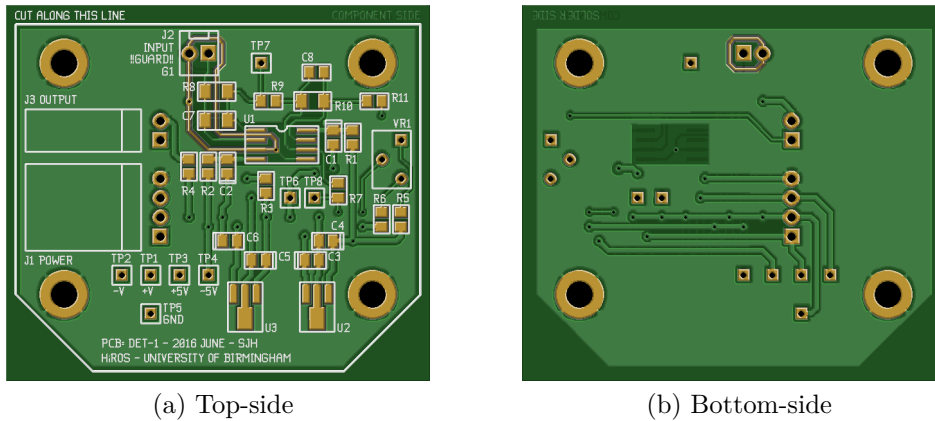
Amplifier PCB photorealistic rendering. (a) shows the top-side of the PCB. (b) shows the bottom-side of the PCB. Note the guard-ring around the high-impedance amplifier input with solder-mask removed.
